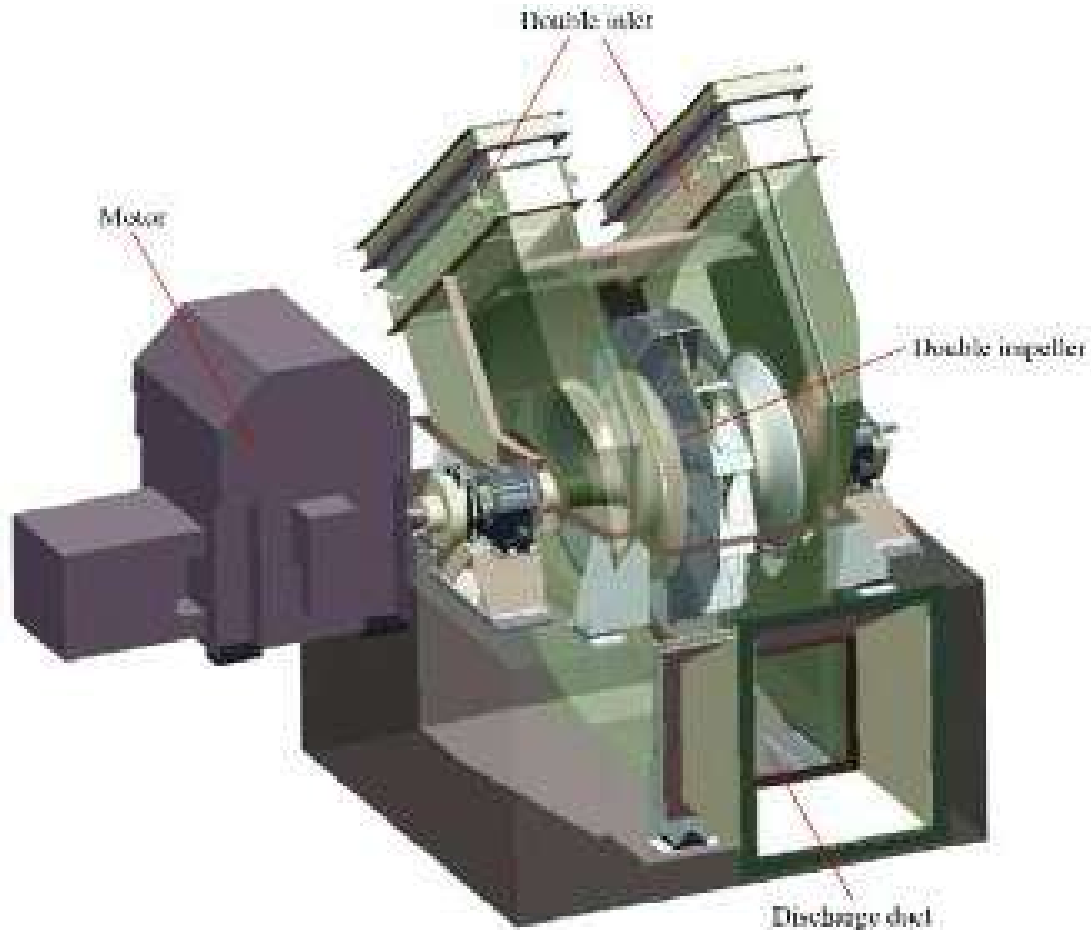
An example of a centrifugal fan with double inlet and cambered plate blades from the studied family of industrial fans.
